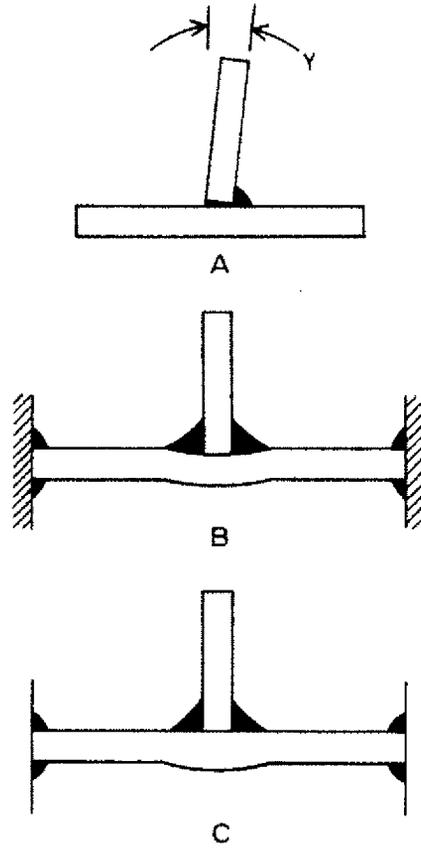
Distortion occurring in fillet welds.
